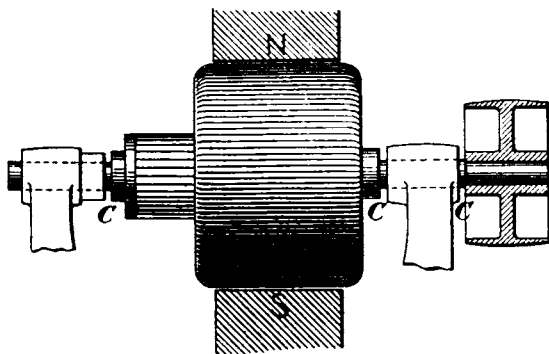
ARMATURE WITH GOOD CLEARANCE AT C C.
